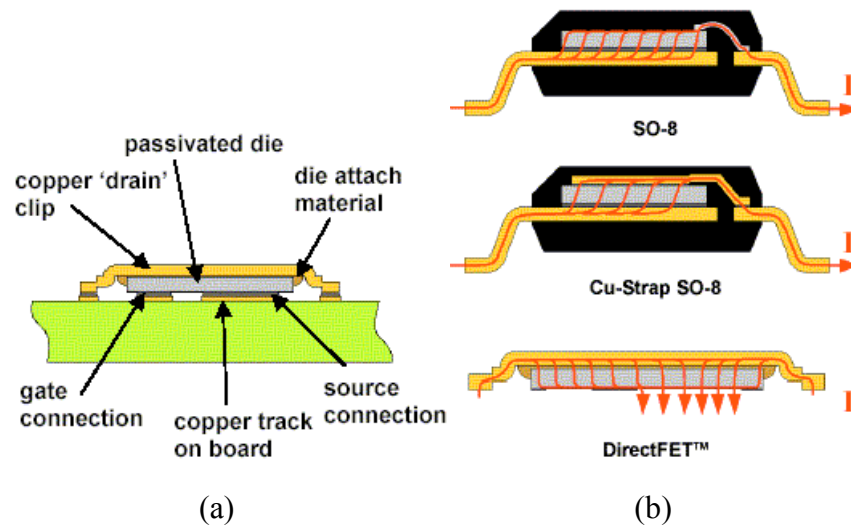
DirectFET™ package (courtesy of IR): (a) cross-section of DirectFET soldered to PCB; and (b) comparison of current conduction paths.
